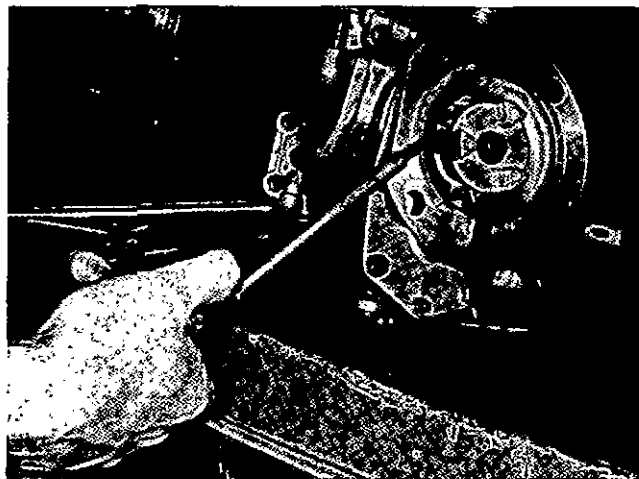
, (F5320). Lubricate the tachometer drive gears in the front cover.
